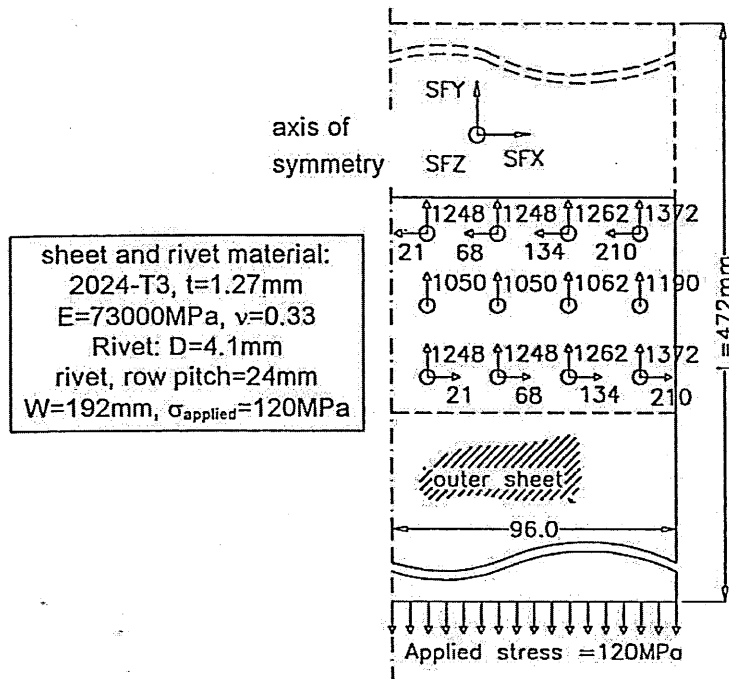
Uniaxially Loaded Lap Joint - Rivet Forces (Reference 9)
